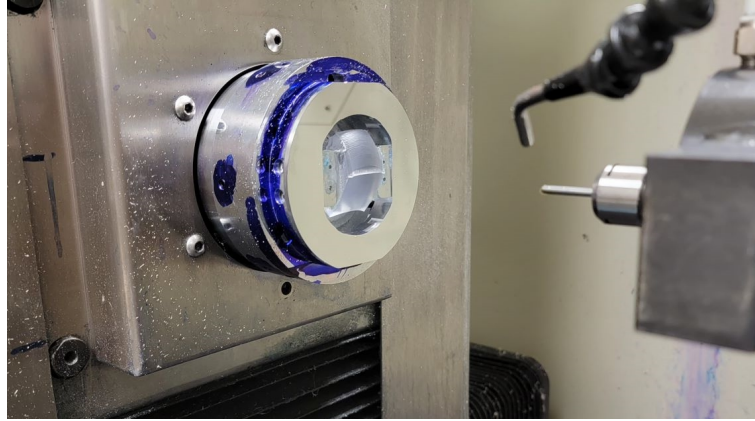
Roughed optical assembly set up on the diamond turning machine.
